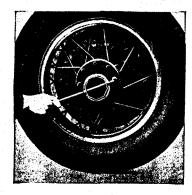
To mount a wheel simply set it up on the hub and start the cap screws by hand. Then tighten the screws with the wrench, but do not tighten them in rotation. After tightening one screw, tighten the screw directly opposite.
